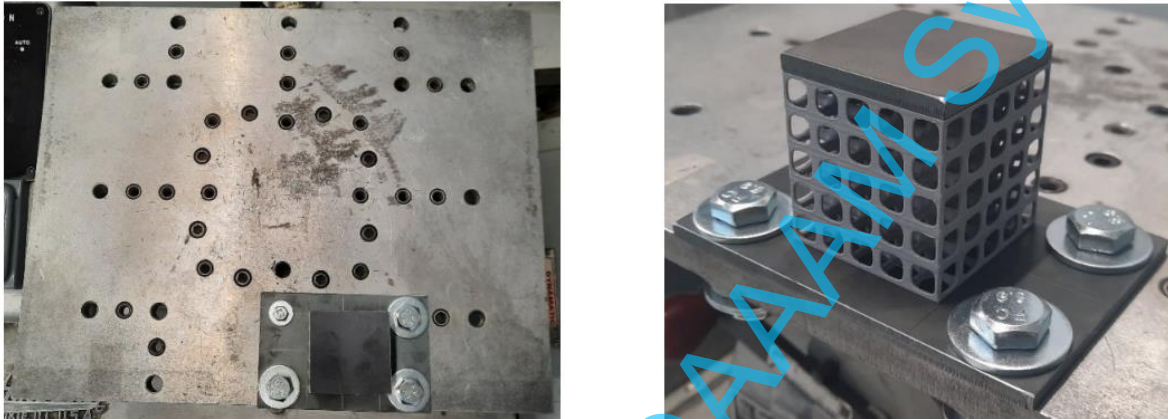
Position of the test samples on the platform (left) and clamping the samples (right)
